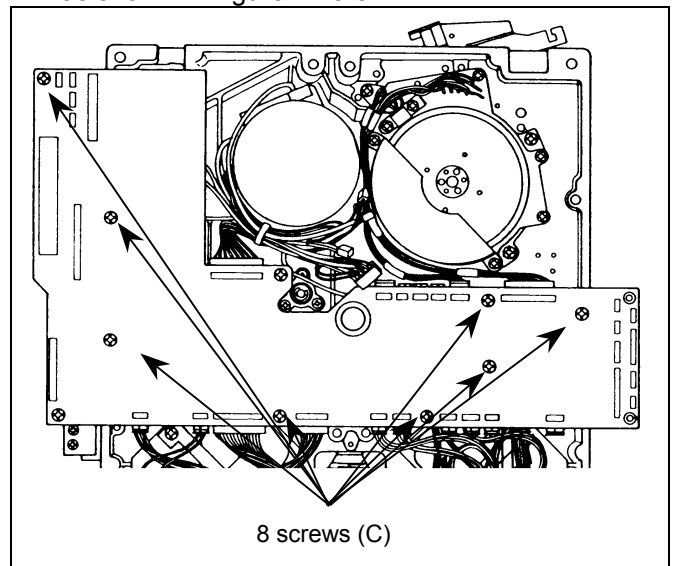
Mech. Intermediate P.C. Board Removal
